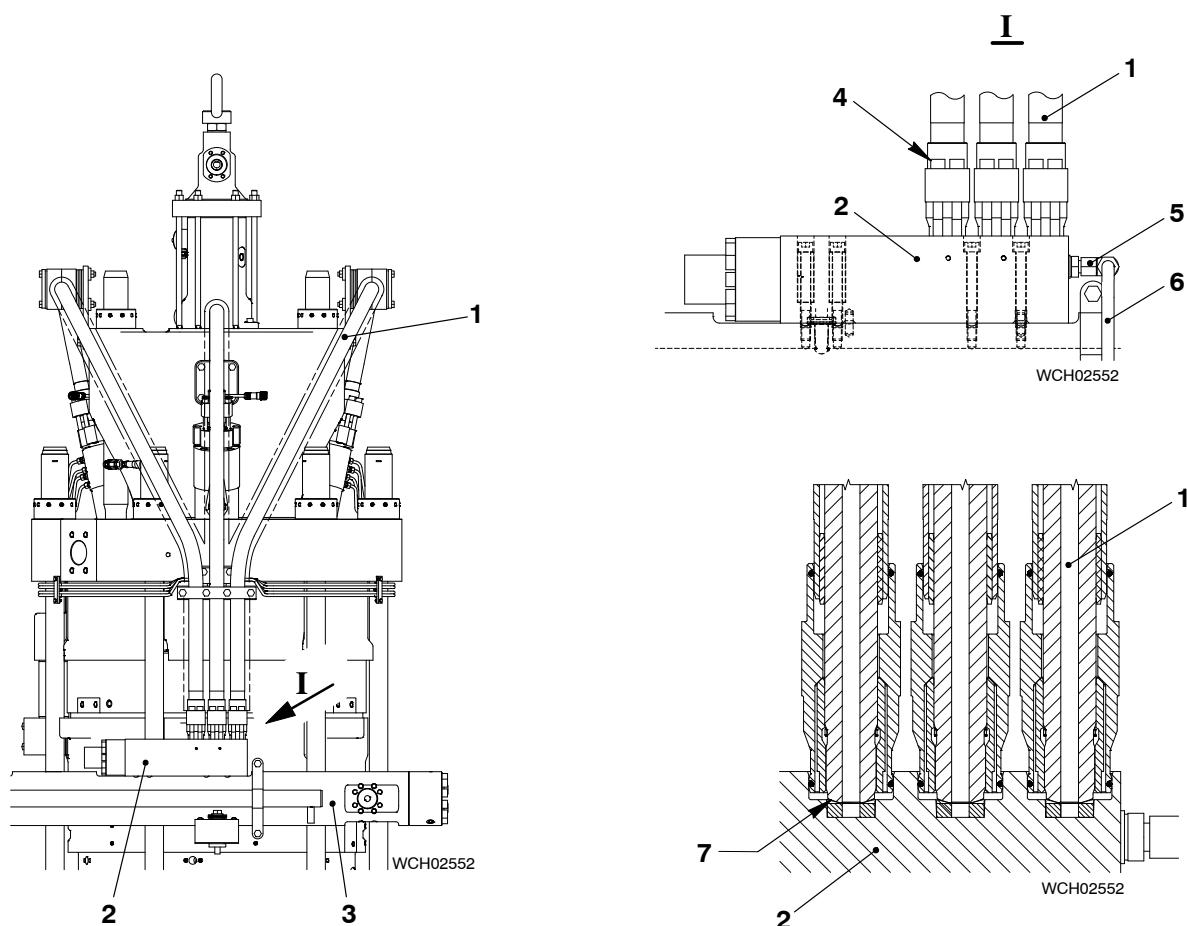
Leakage Inspection Point – HP Fuel Pipes to Injection Valves
